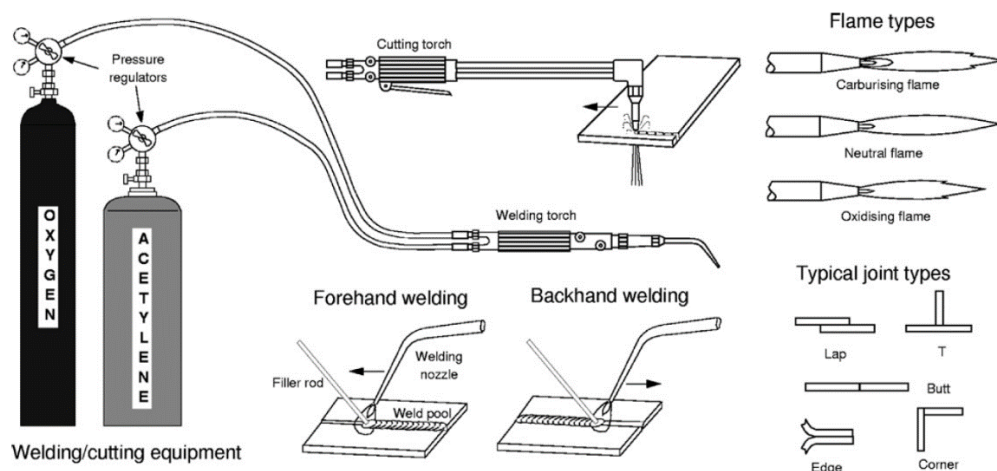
Oxy-fuel Gas Welding Equipment (Swift & Booker, 2013).
